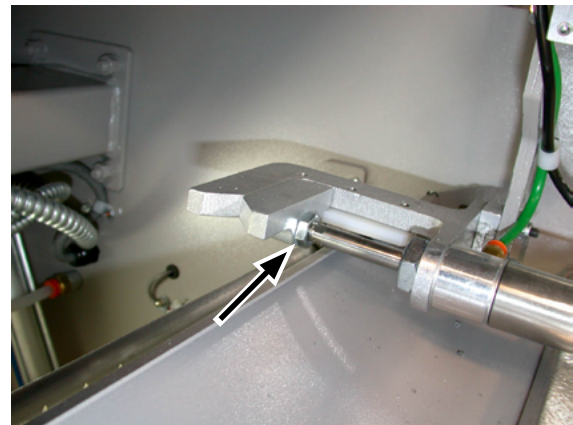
The spreader clamp air cylinder rod and jam nut.
